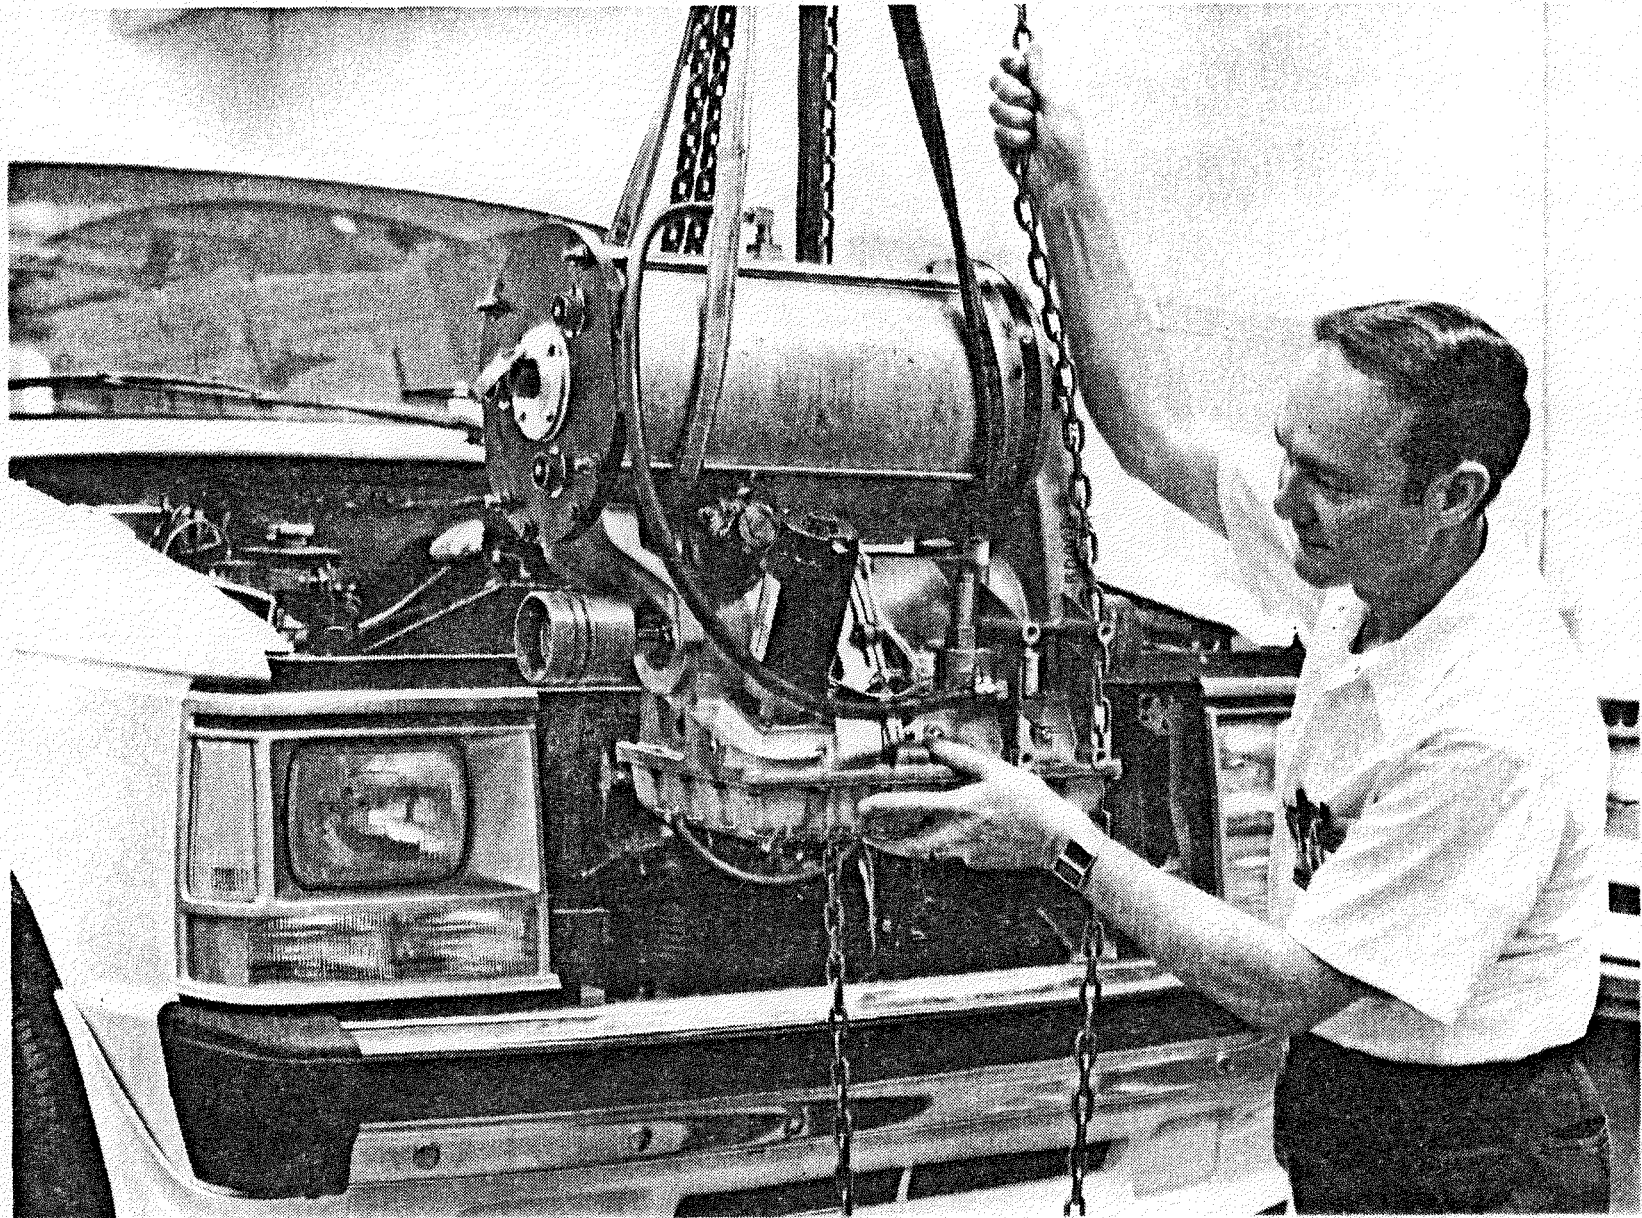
MOTOR/TRANSAXLE ASSEMBLY
